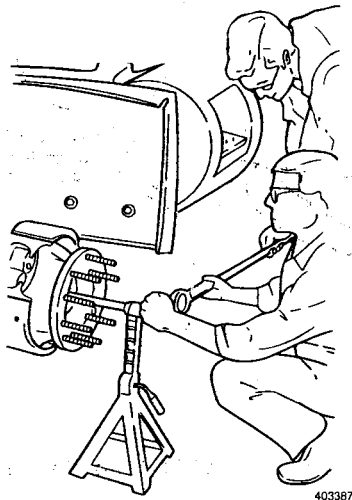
Final Hub Nut Tightening (Shown with Wheel Removed)
